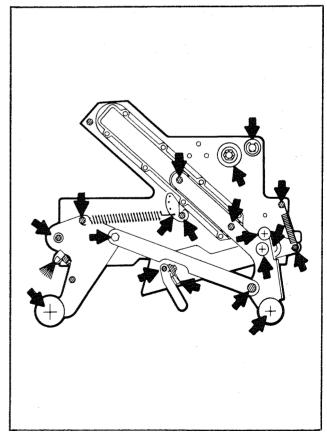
Lubrication Points - Top And Bottom Taping Head
